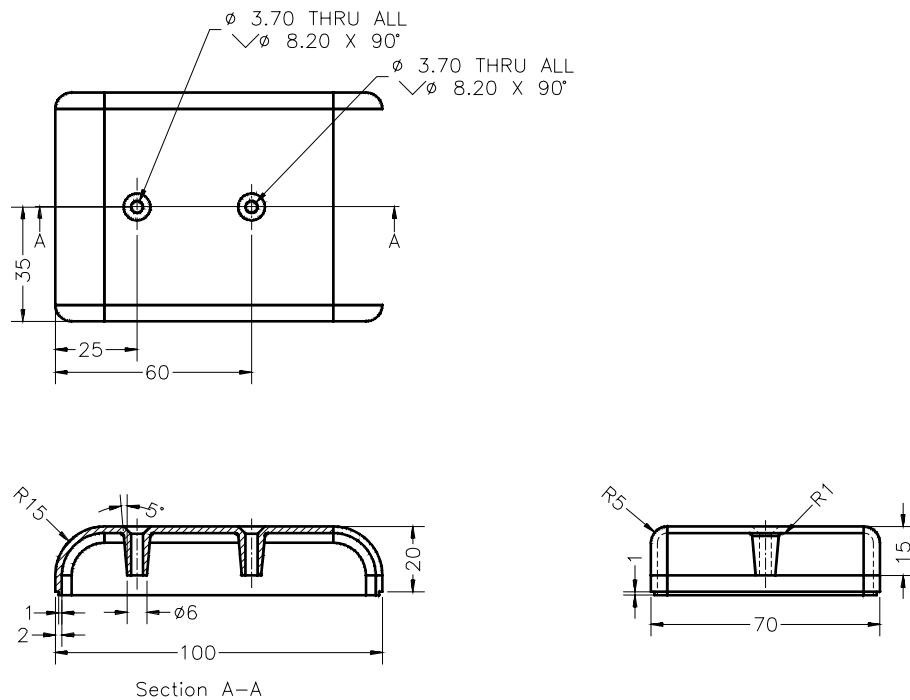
Top view, Front section view, and right-side view with dimensions
